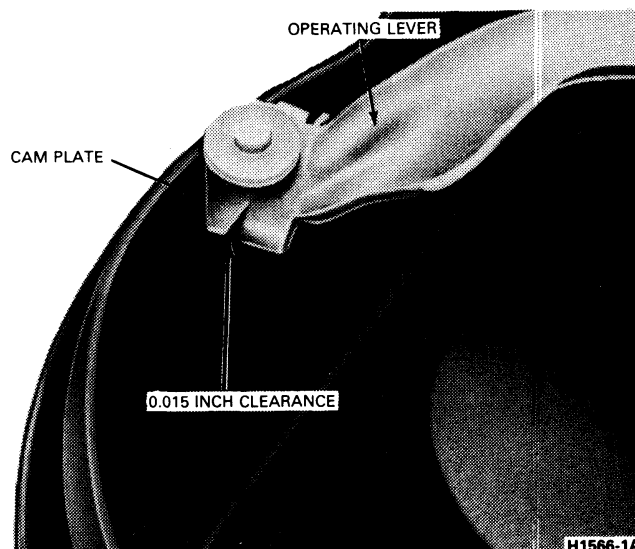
Parking Brake Operating Lever and Cam Plate Clearance—Web Ledge Brakes
